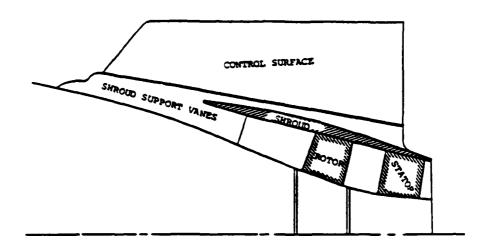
A TYPICAL PUMPJET BLADE AND SHROUD CONFIGURATION
